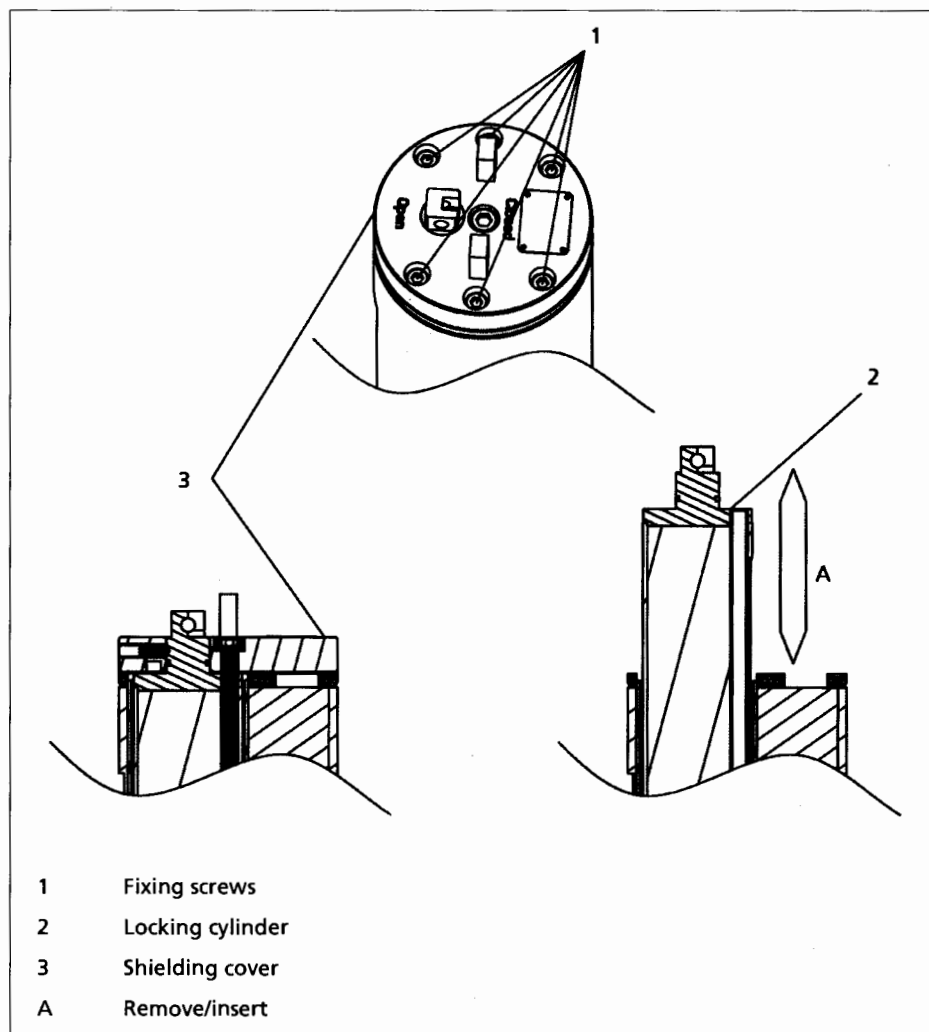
Dismounting and mounting the locking cylinder of a Operation shield-ing
